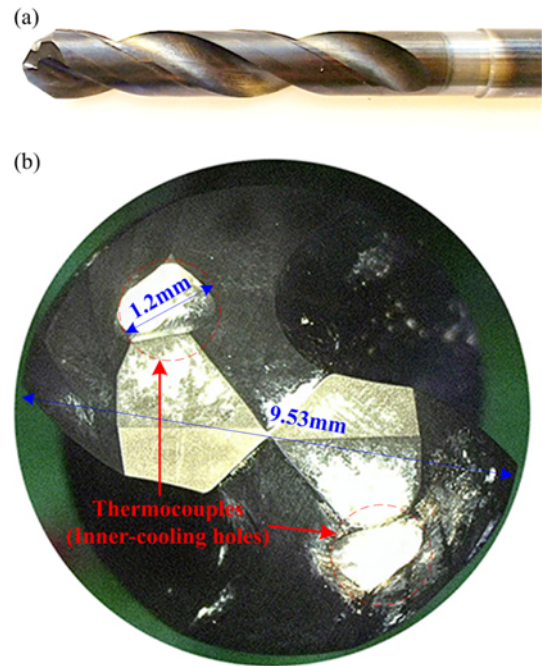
Tool morphologies of the used drill bits (a) side view, (b) drill tip view
